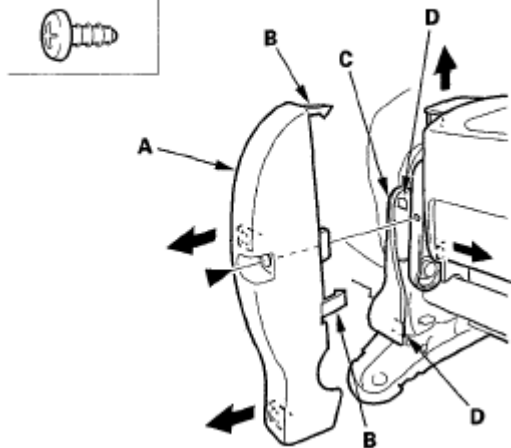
Identifying Rear Center Outer Cover, Hooks And Center Inner Cover
